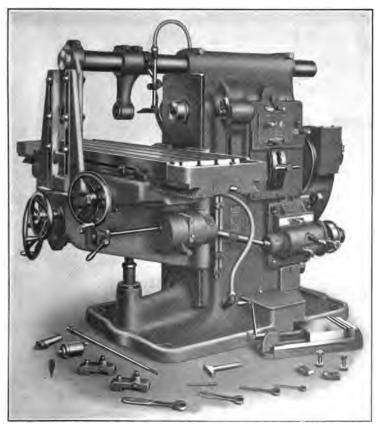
No. 5B Heavy plain milling machine. (Courtesy Brown & Sharpe Mfg. Co.)
